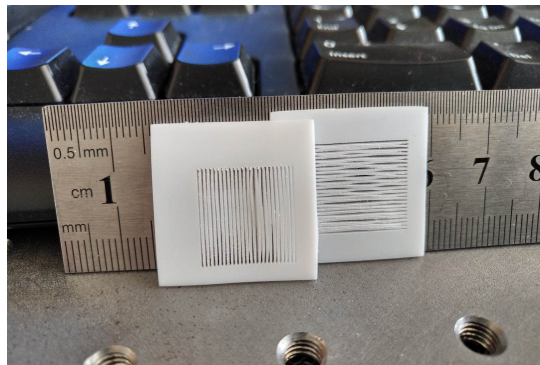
PLA phase plates, printed using FDM 3D printer with 0.2 mm nozzle size.
